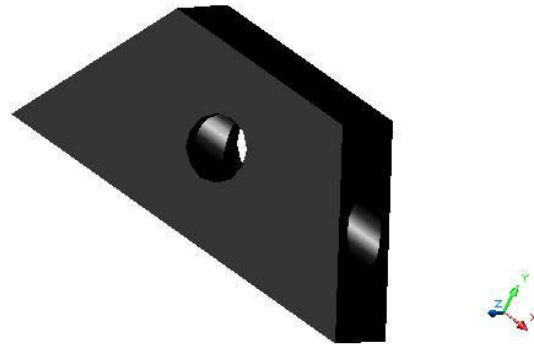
Solid model of a wedge shaped part with perpendicular through holes
